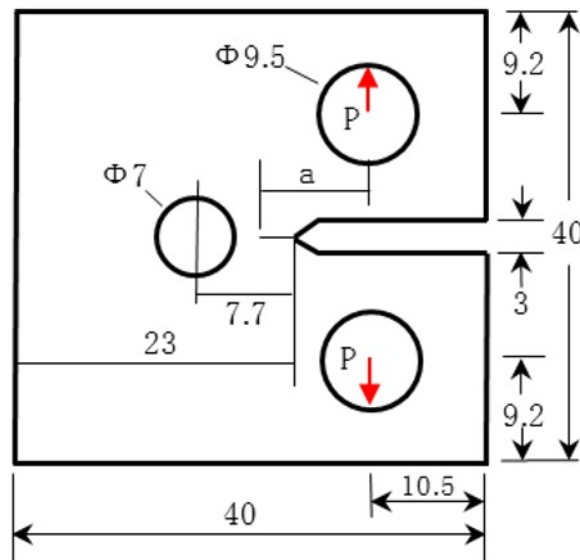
Geometry of the modified CT specimen (dimensions in mm).
